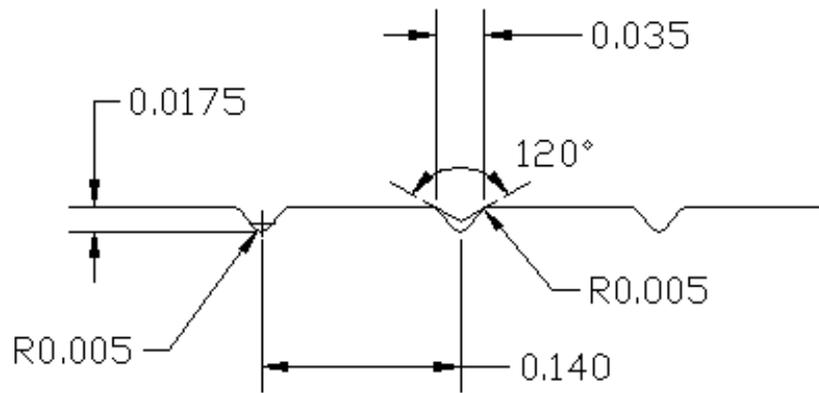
V-groove specification (all dimensions in inches and degrees)
